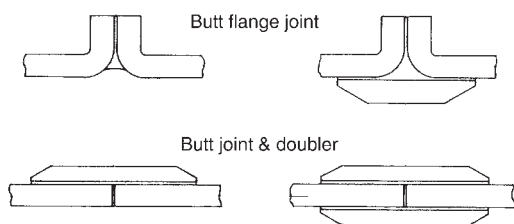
Butt-joint designs for sheet metal brazements. Source: American Welding Society 1991
